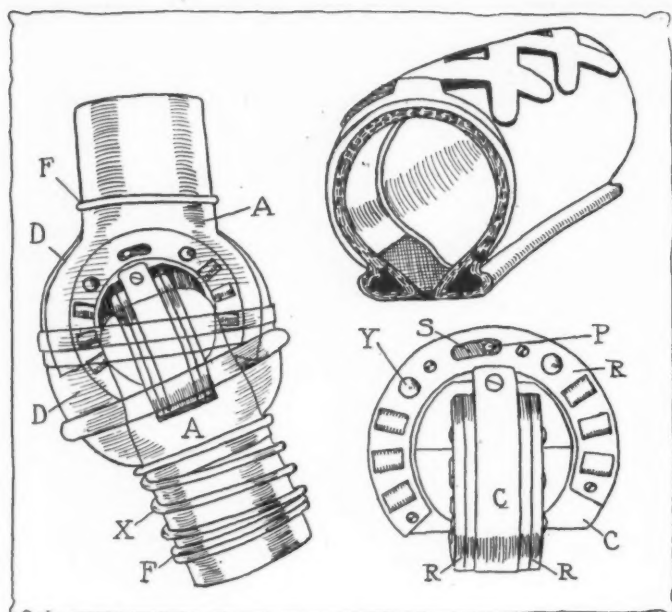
Phantom view of the roller bearing universal joint made by the Michigan Auto-Joint Co. Fig. 6—The two center blocks. Fig. 7—New non-skid casing made by the Mohawk Rubber Co.
